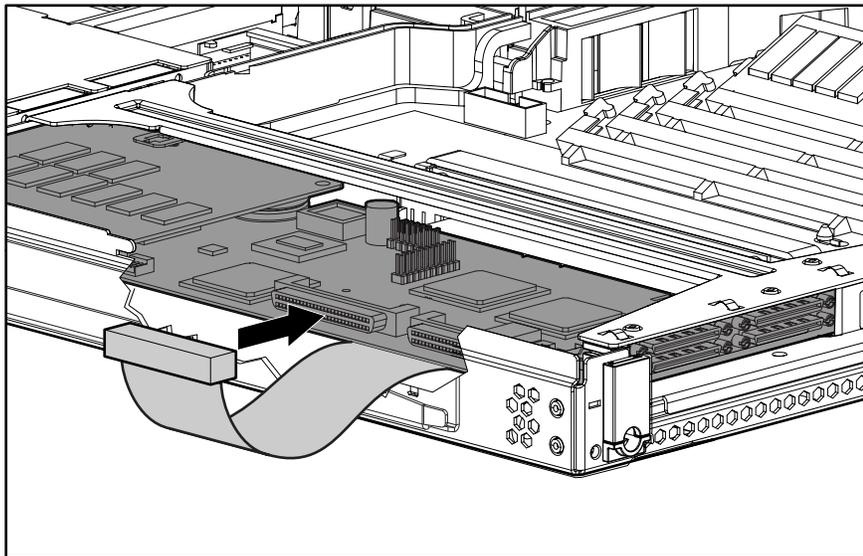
Smart Array/SCSI controller interface assembly cable connection to expansion board
